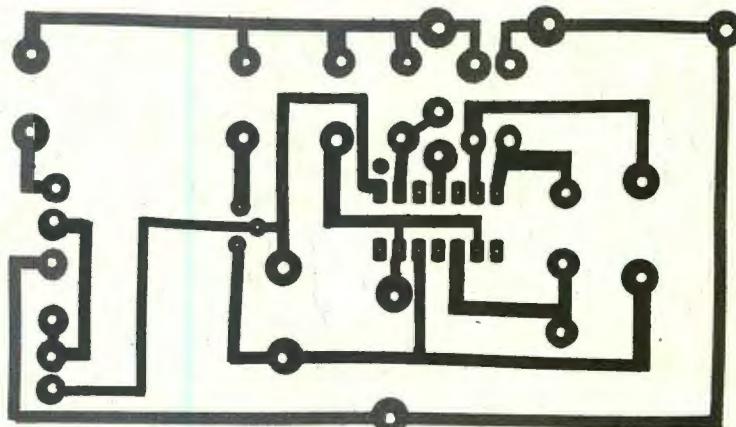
Actual-size etching and drilling guide at right. Parts placement guide above.
